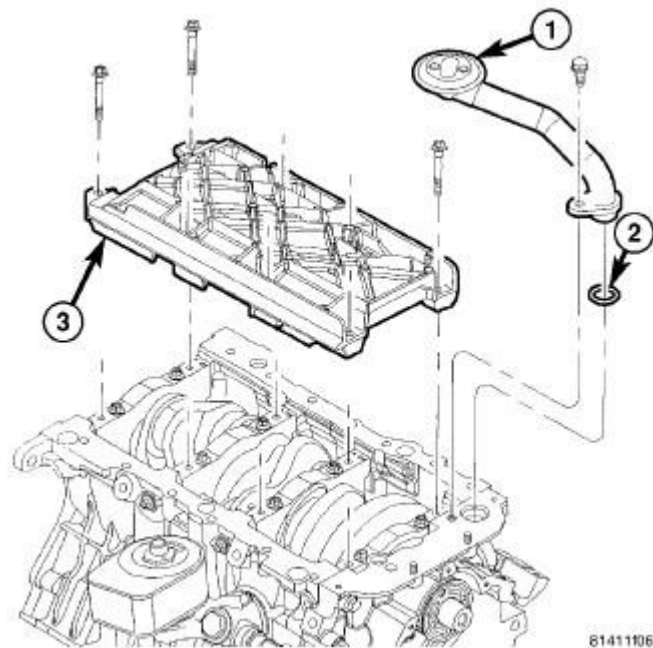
OIL PICK UP TUBE & WINDAGE TRAY
